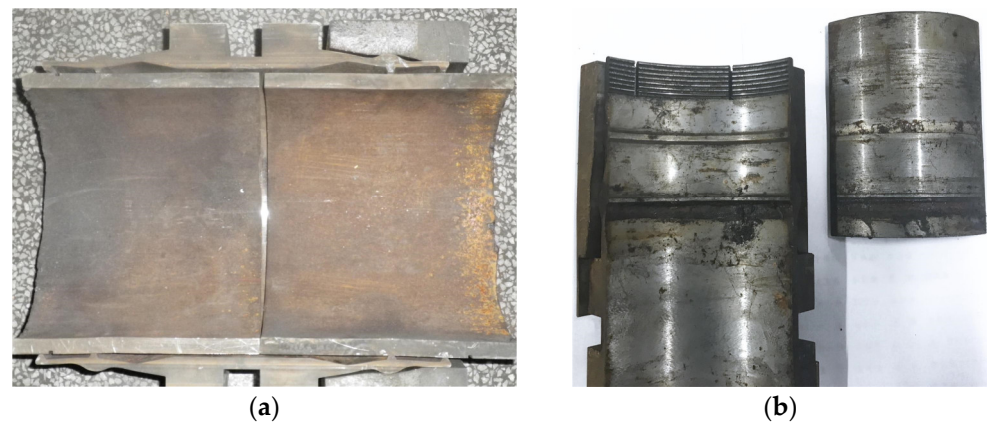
Section view of assemblies of (a) DN 200 and (b) DN 80.
